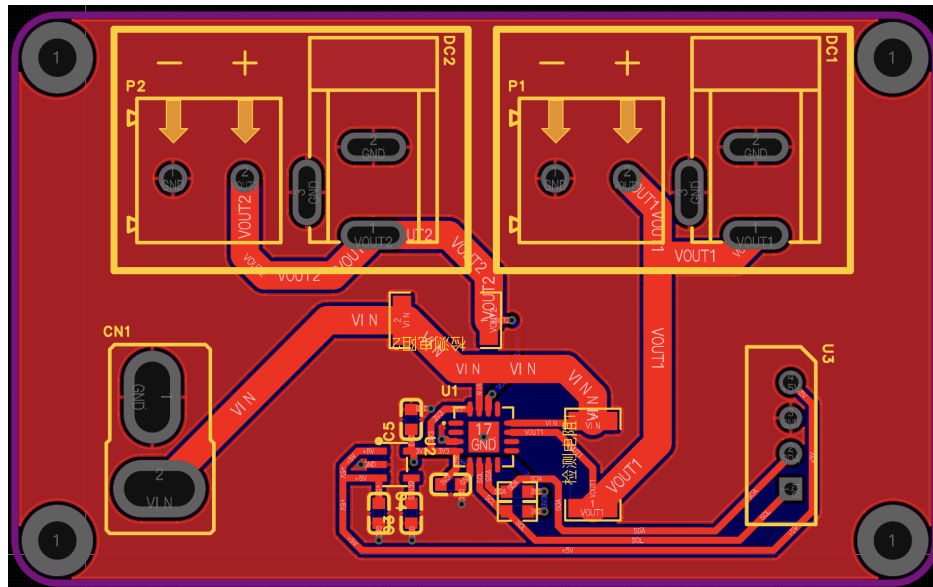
Custom designed PCB layout highlighting high-current power traces, filter network topologies, and terminal block interfaces.
